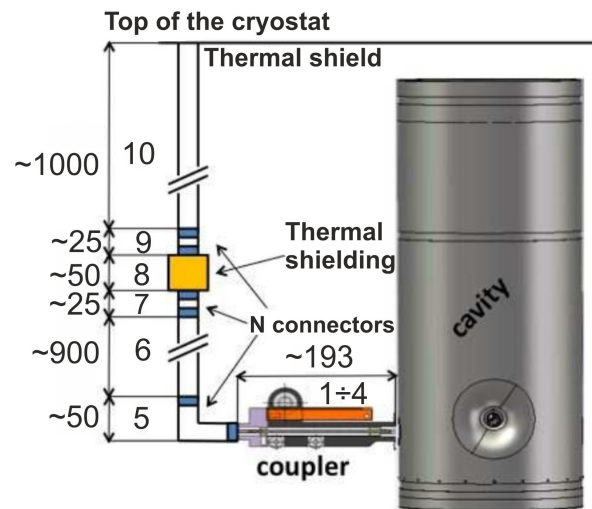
Layout of the HIE-ISOLDE coupler.
